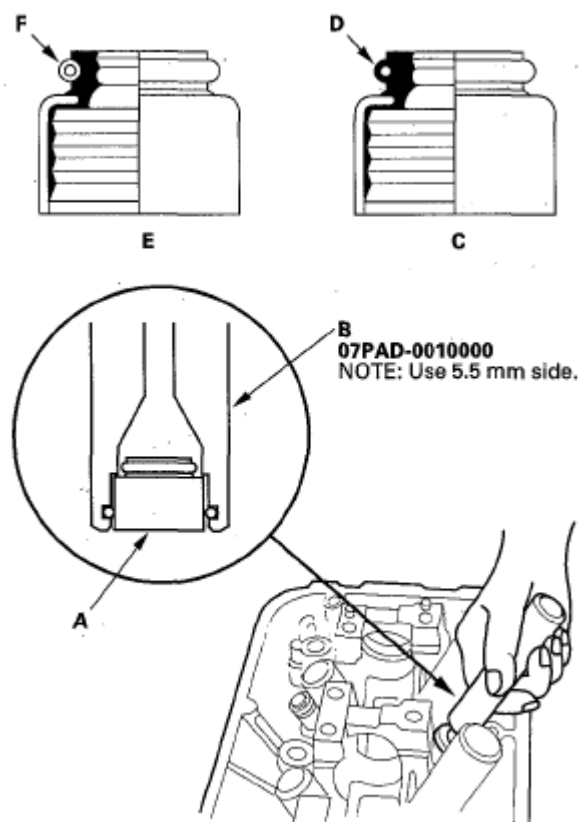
Identifying Valve Seals Using Stem Seal Driver
